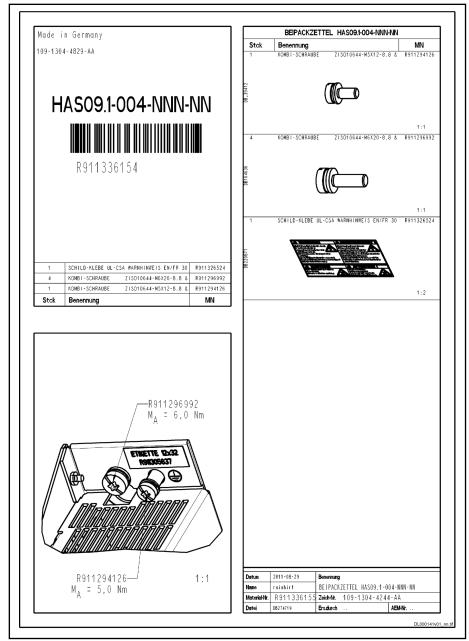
HAS09.1-004-NNN-NN product insert
